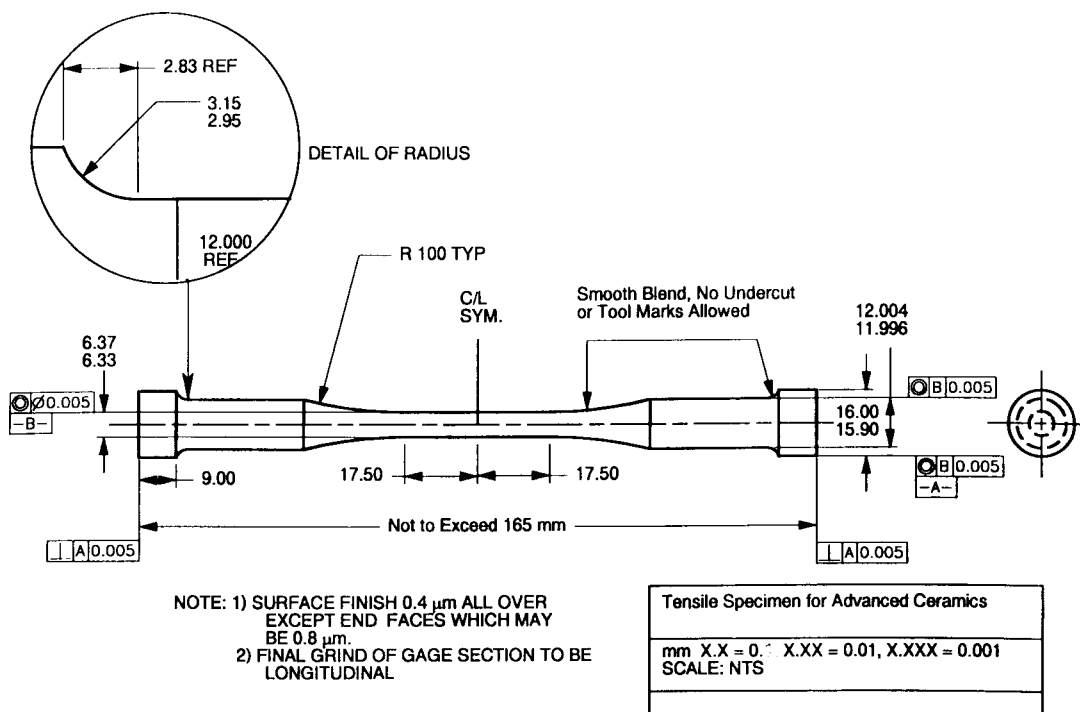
Example of a Cylindrical Button-Head Tensile Specimen (3)
